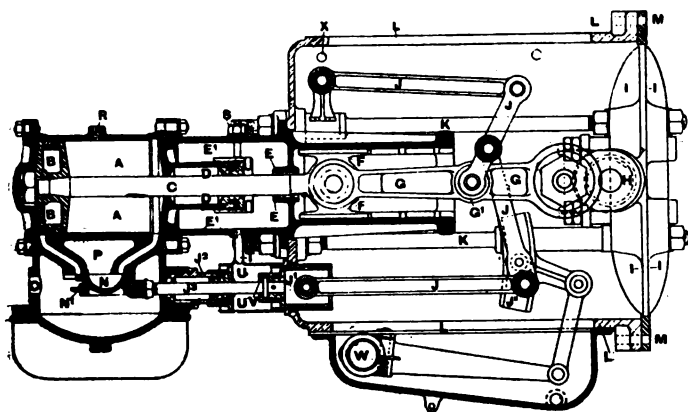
LONGITUDINAL SECTION OF ENGINE.
